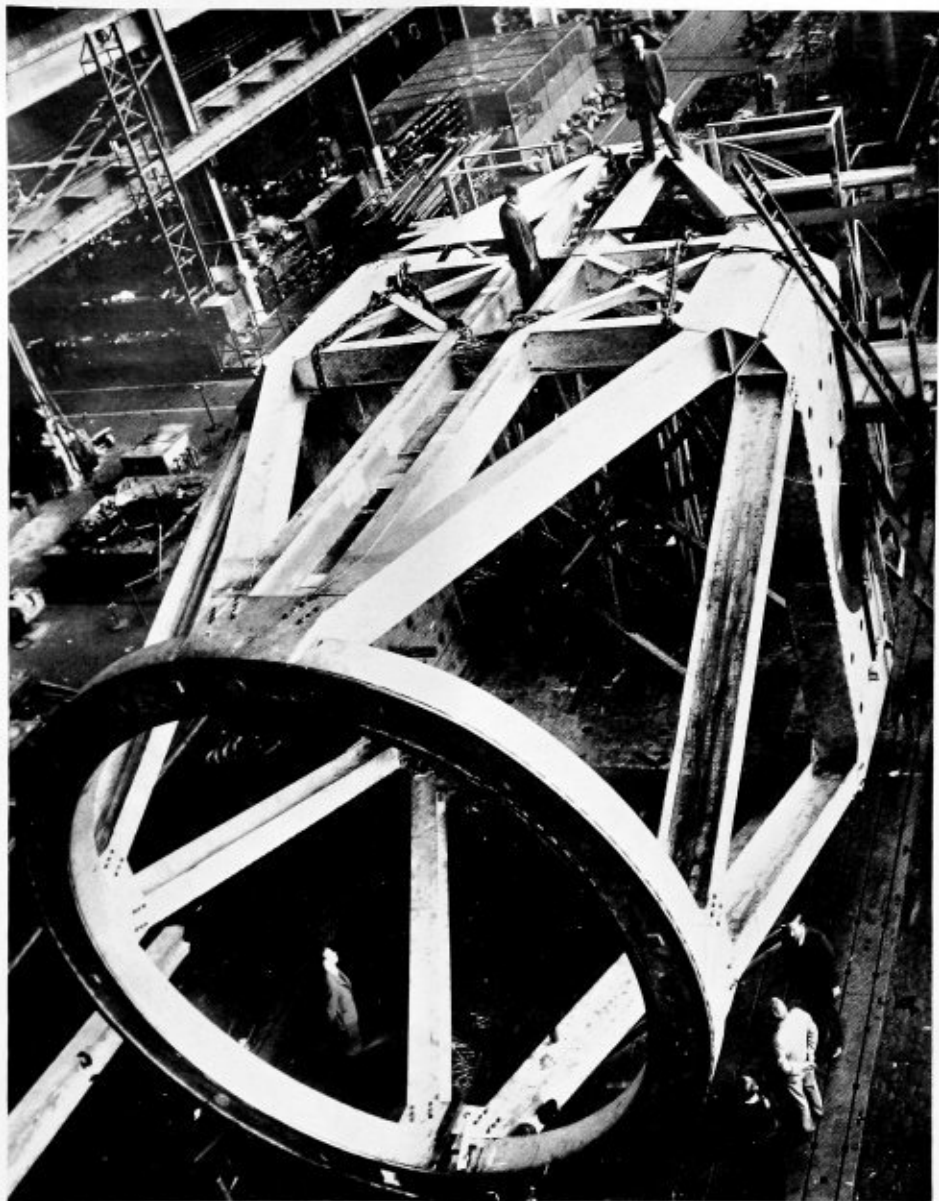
The completed tube which will carry the 200-inch mirror and form the barrel of the telescope. Fig. 8.—(Right) Main section of the tube partially assembled
